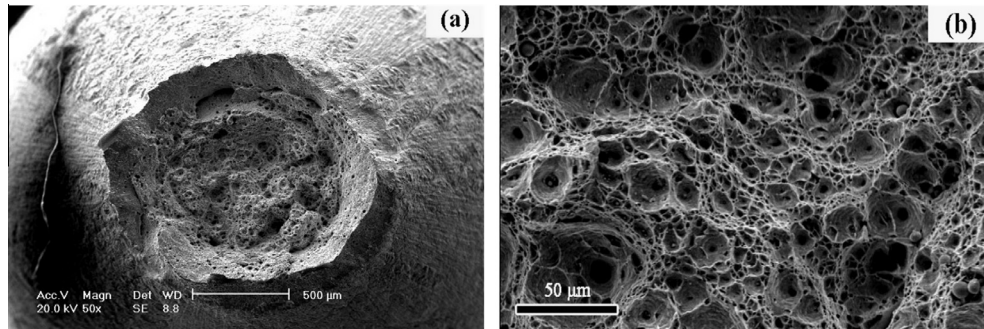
(a) Necking regions and (b) fracture surface of the specimen tested at 210 MPa and 823 K.
